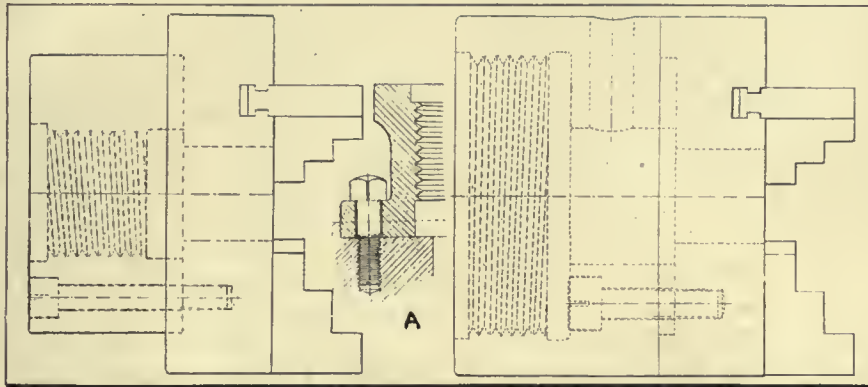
FIG. 10. TYPICAL METHODS OF ATTACHING CHUCKS TO LATHE SPINDLES.
